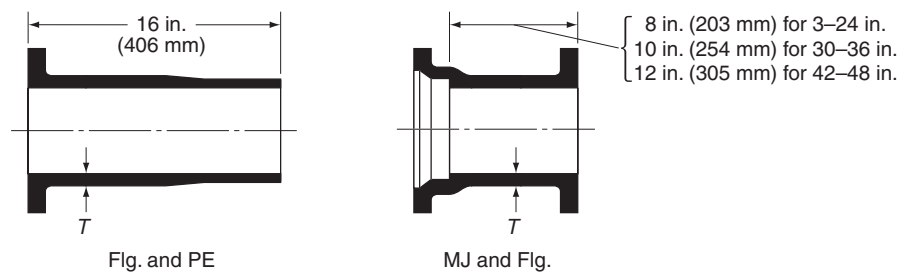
Connecting pieces, one-end flanged (see Table 12)
